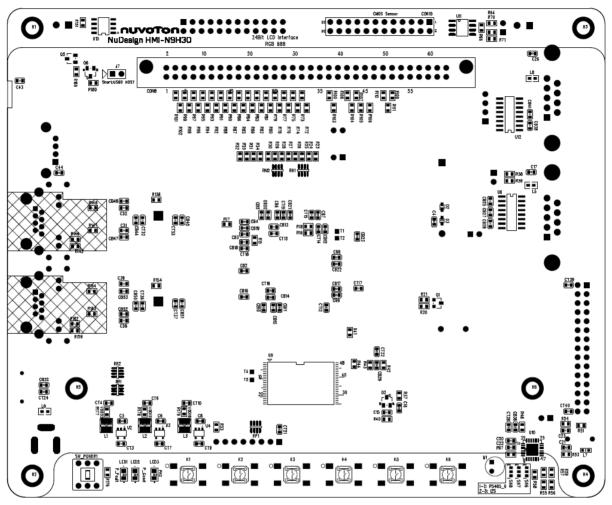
NuMaker-emWin-N9H30 Front PCB Placement
